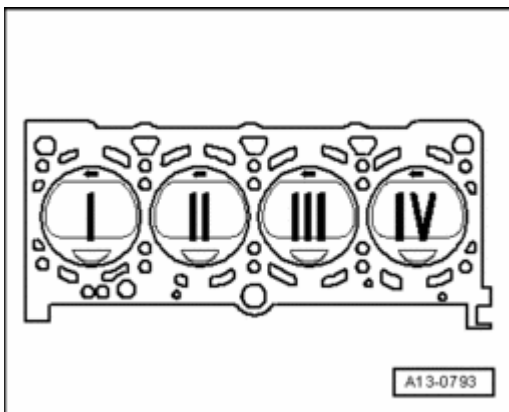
Installed Position Of Piston And Piston/Cylinder Allocation
